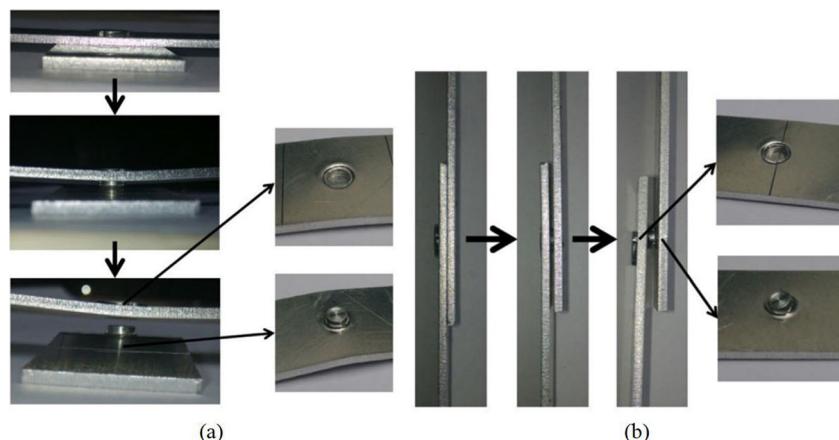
Neck fracture of joint in (a) tensile test and (b) shearing test [36]
